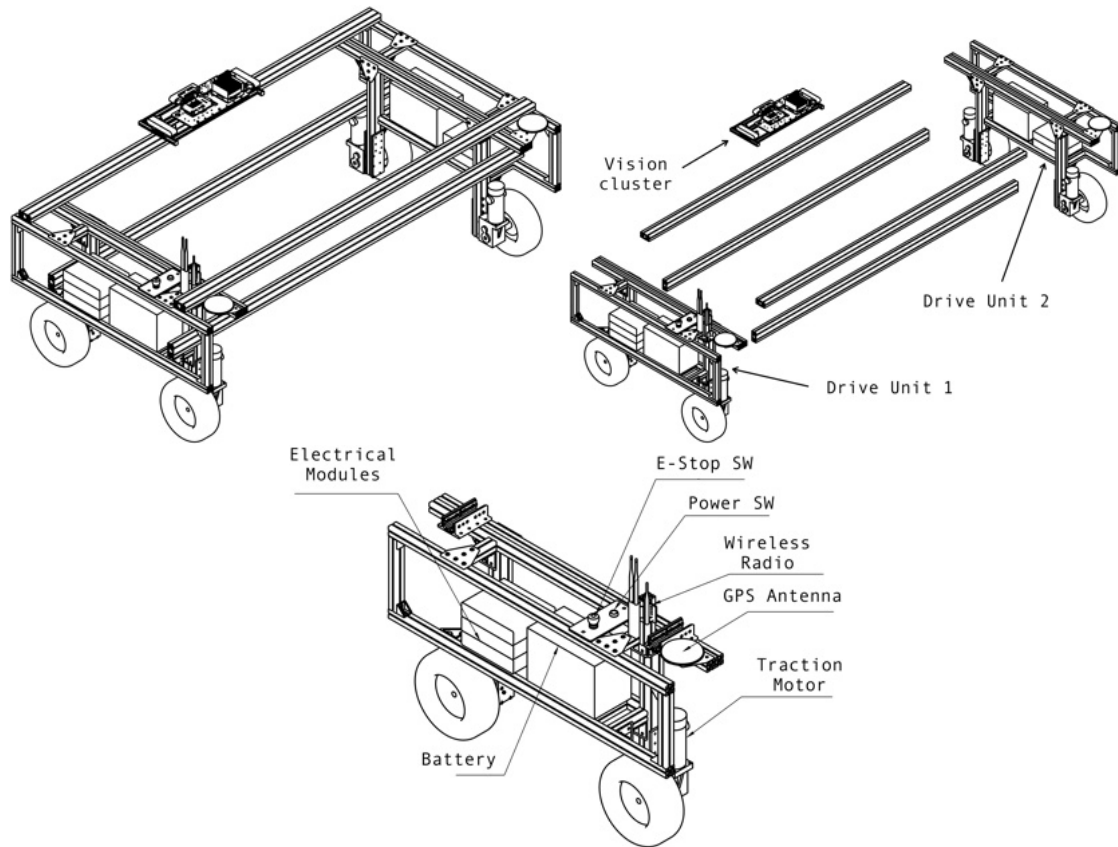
AgBot: CAD Design with 2 Drive Units
